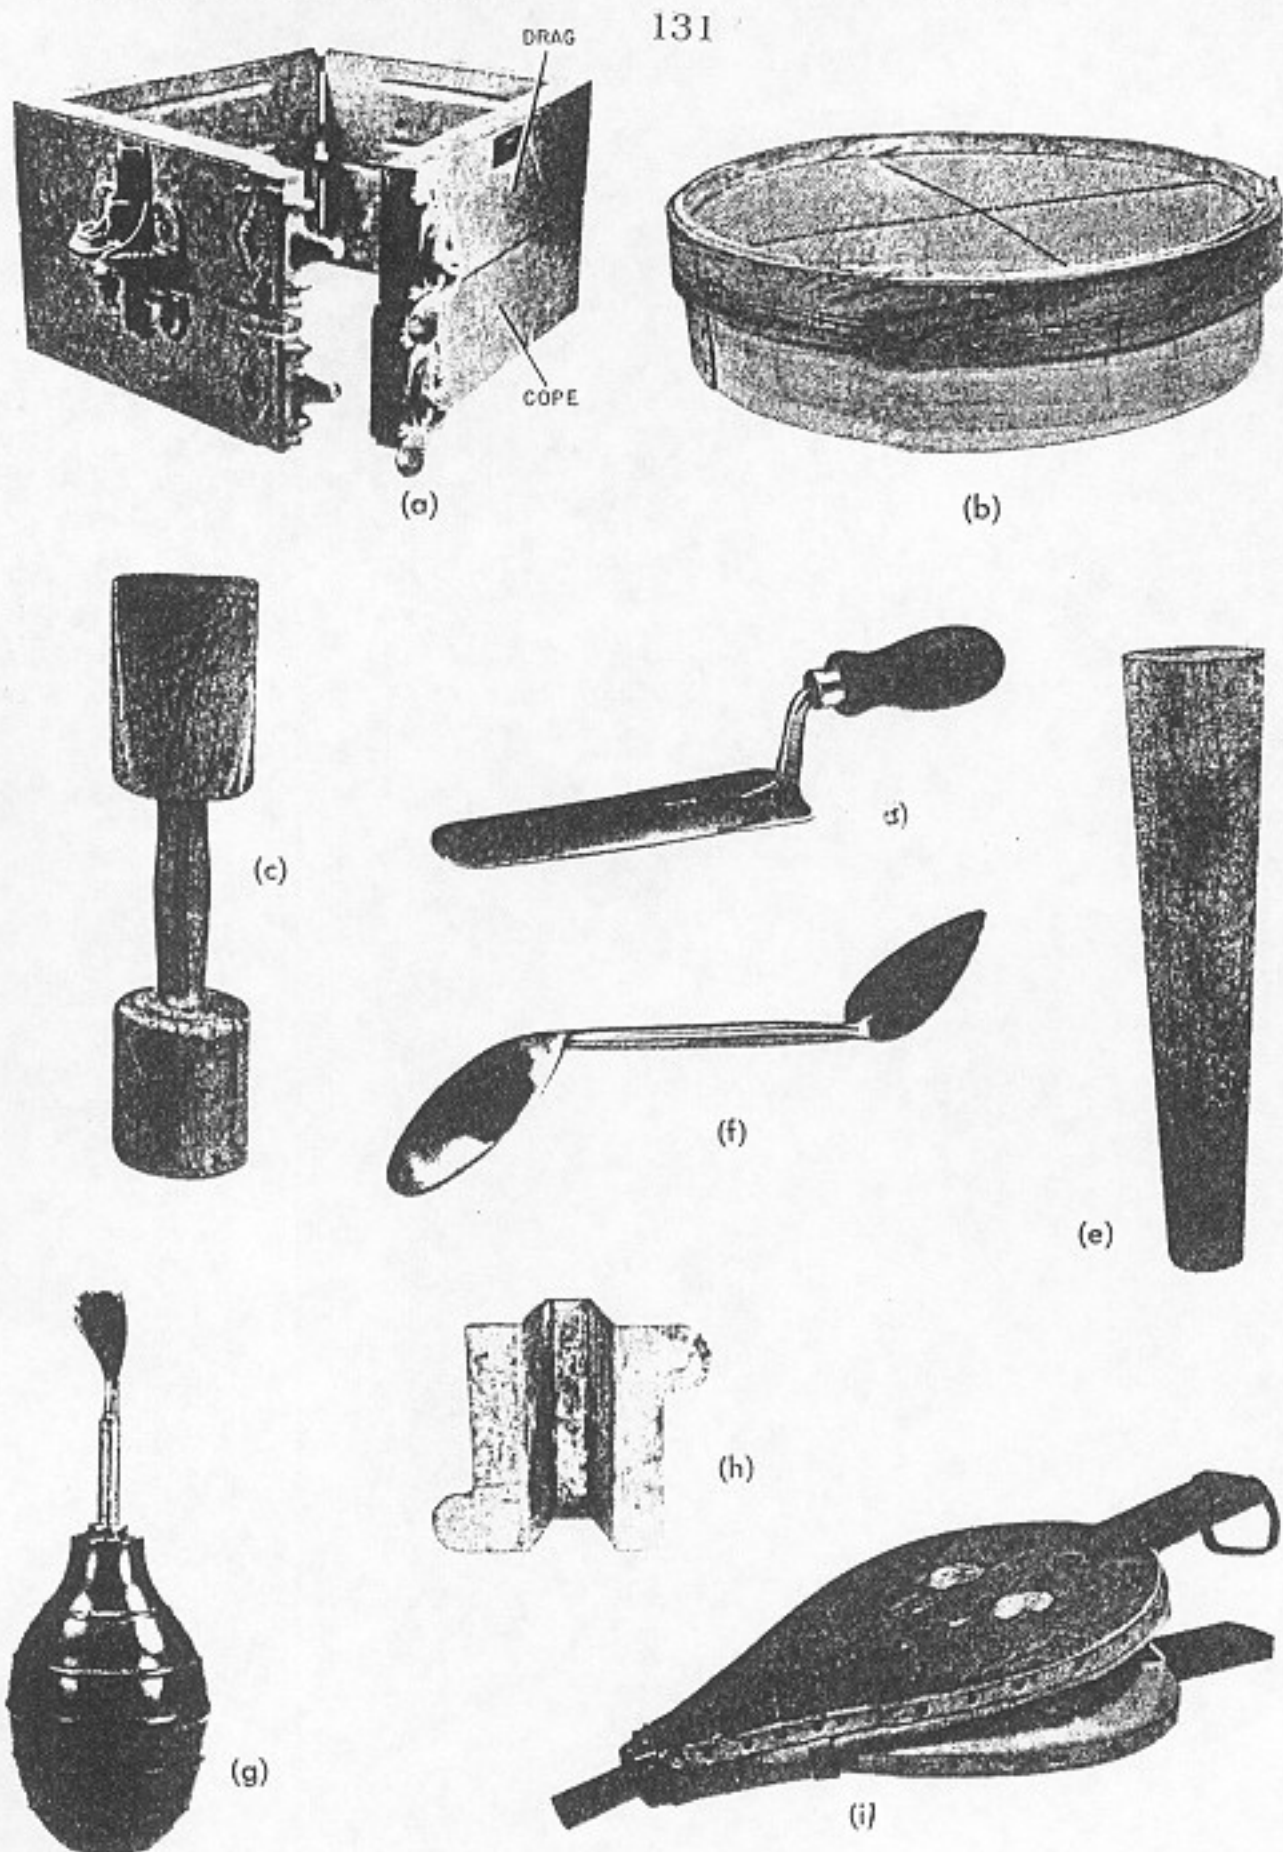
Tools Used in Molding. (a) Flask. (b) Riddle. (c) Hand rammer. (d) Trowel. (e) Sprue and riser. (f) Slick and spoon. (g) Bulb sponge. (h) Gate cutter. (i) Bellows.
